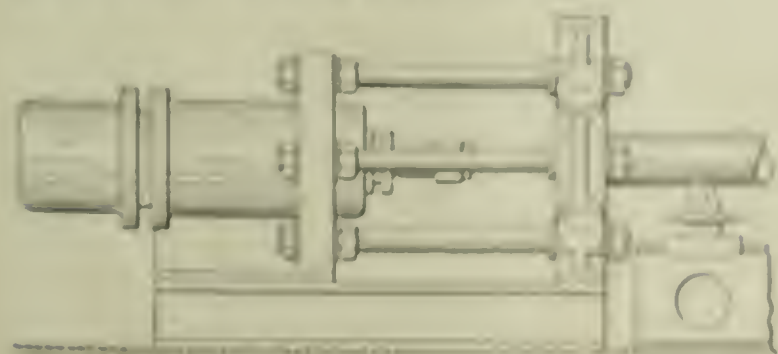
PIPE SUPPORTED BY RACK AND HYDRAULIC FLANGE CHUCK IN PLACE
